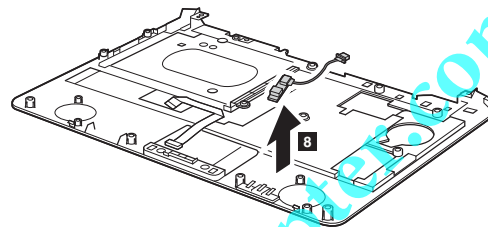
Removal steps of Keyboard bezel, speakers and bluetooth card (continued)
